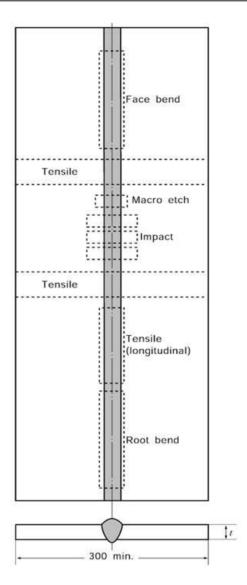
Welding procedure test assembly (Unit : mm) (cont'd)
